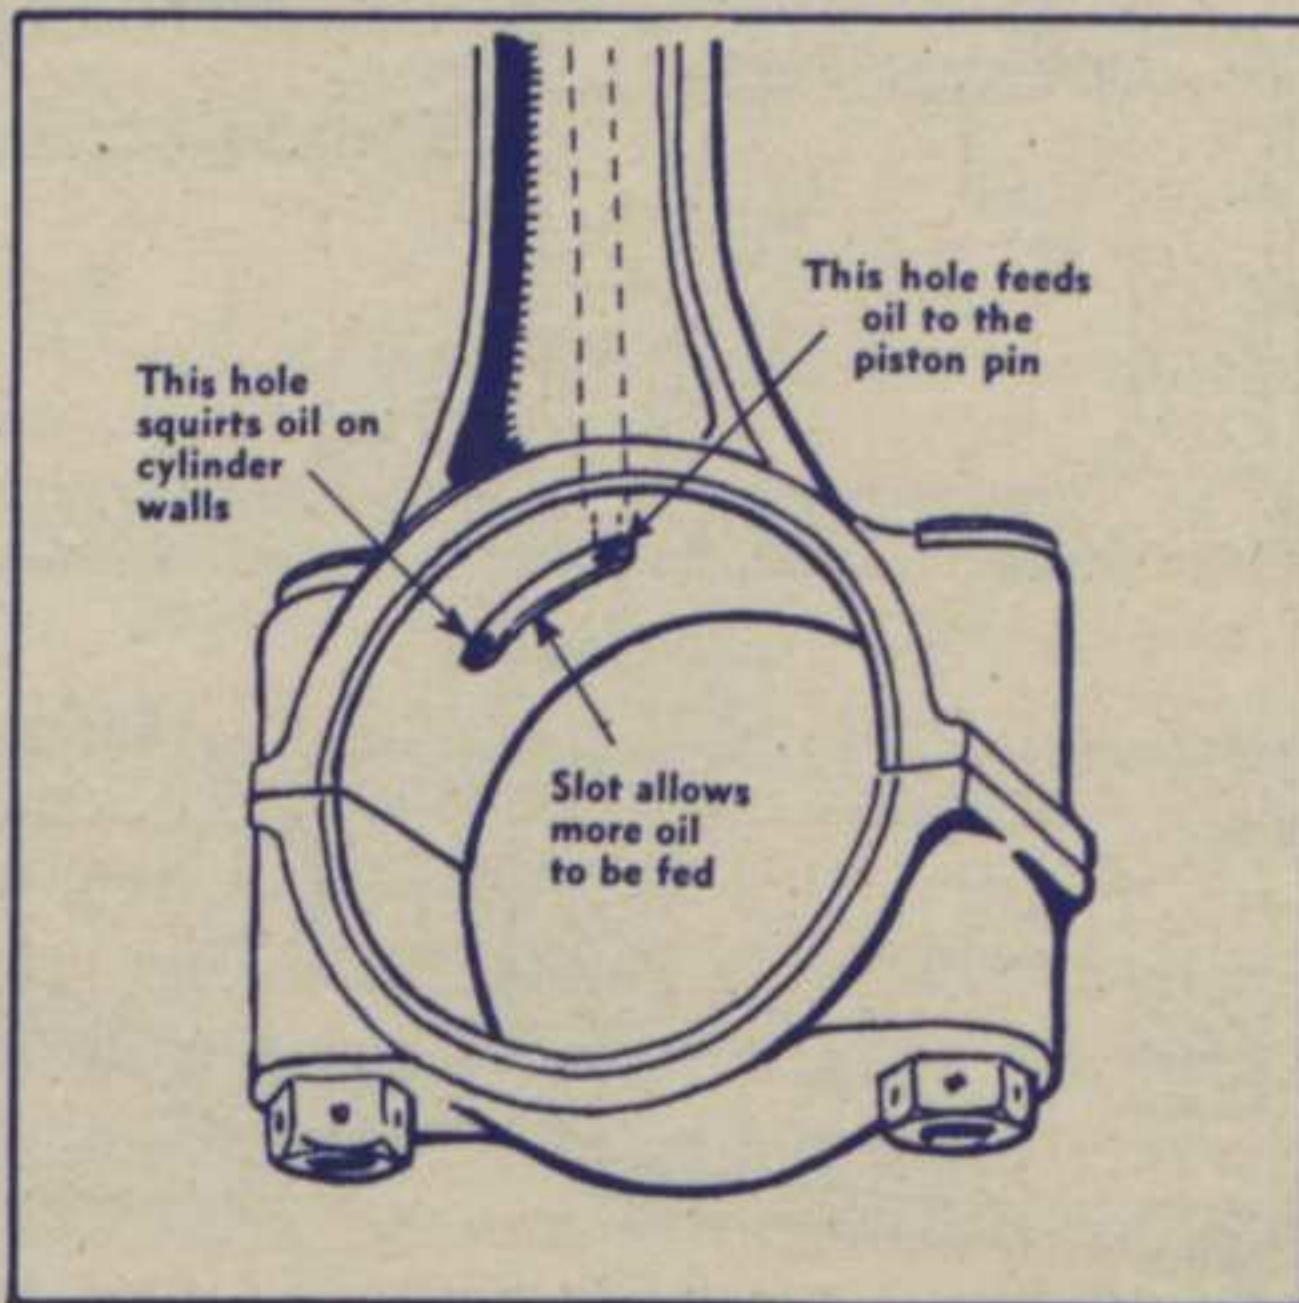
Connecting rod improvements for better oiling of piston pin and cylinder.
